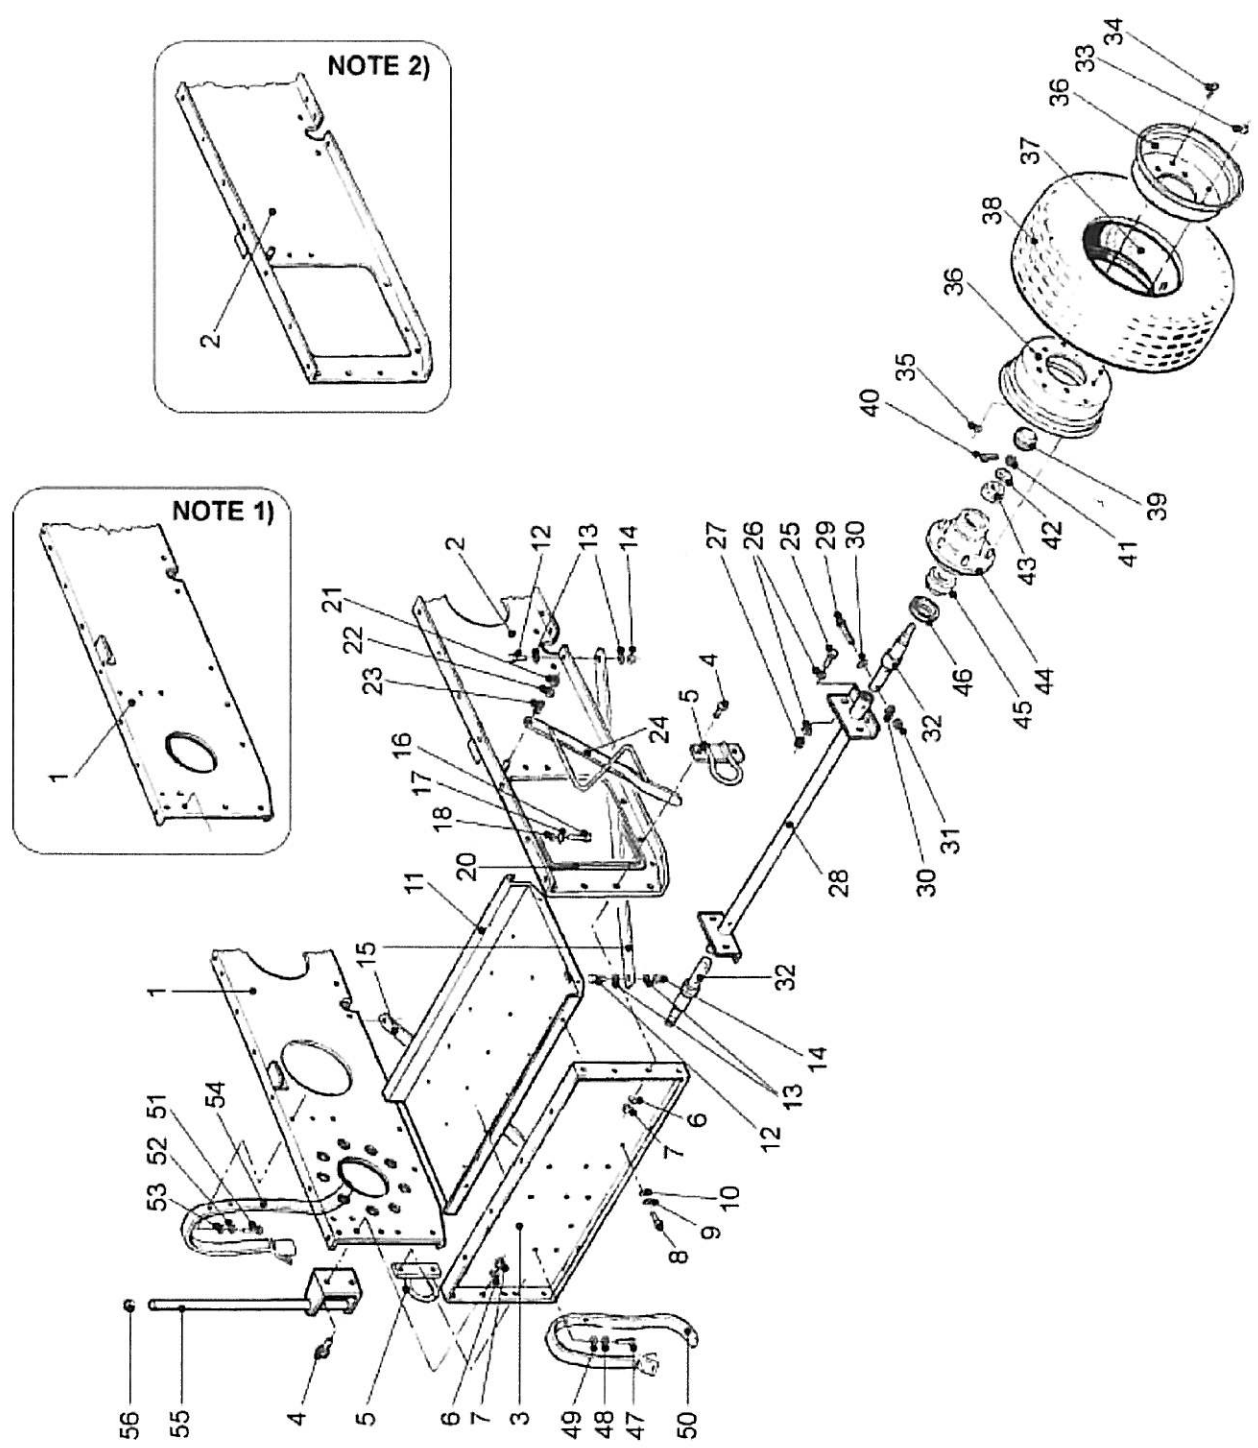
TRAILER/RUNNING GEAR GROUP (SHEET 1 OF 2)
